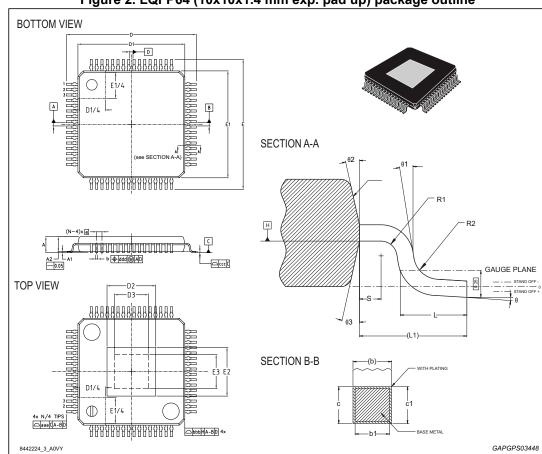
LQFP64 (10x10x1.4 mm exp. pad up) package outline
